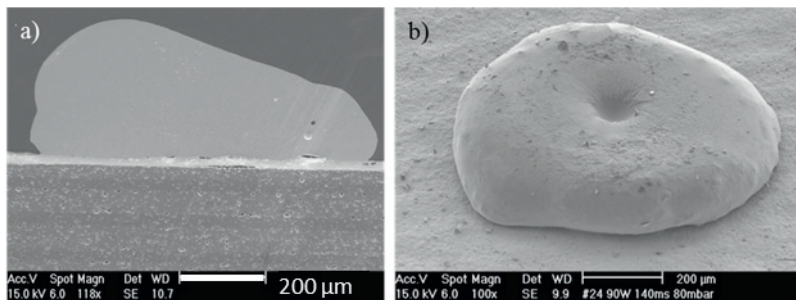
a) Cross-sectional view of a brazing; b) Laser damage on a brazing due to pulse duration and Rayleigh range being too long.
